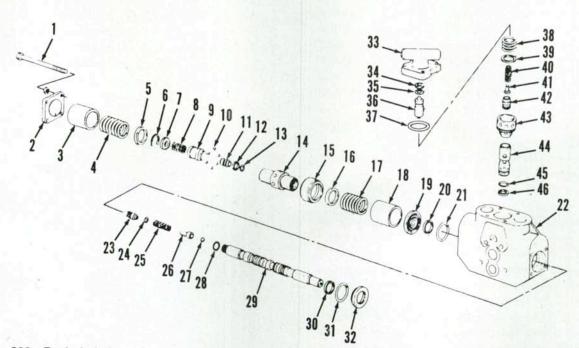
Exploded view of remote control valve assembly used on tractors produced prior to April 1985.
